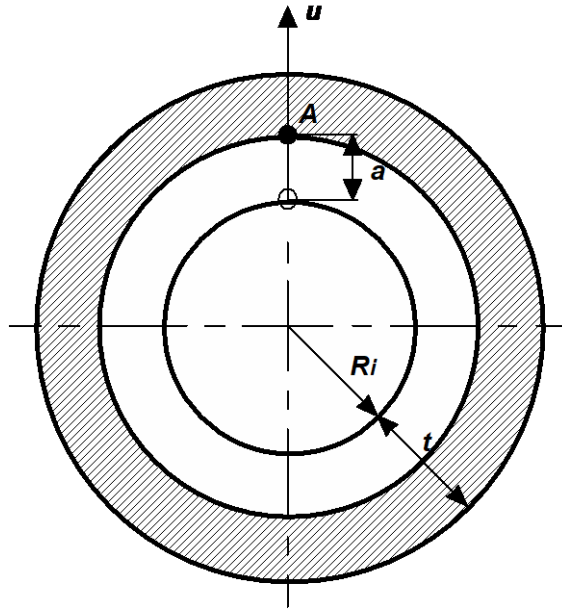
Complete circumferential internal surface crack in a cylinder.
